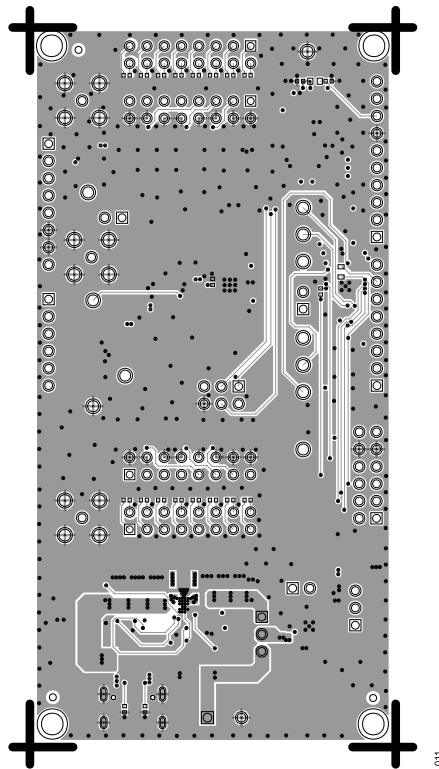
EVAL-AD3532RARDZ Bottom Side Routing
